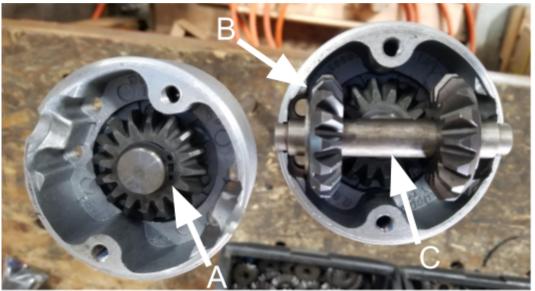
Axle halves. A) Locking collar; B) Sprocket; C) Differential pin
